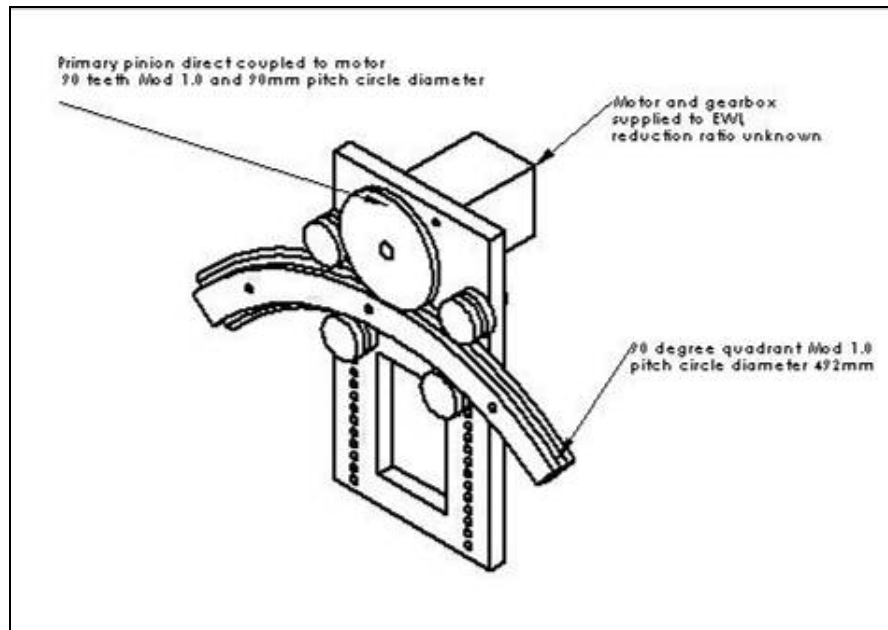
Mounting Bracket and Design for Torch Travel Angle Bracket
